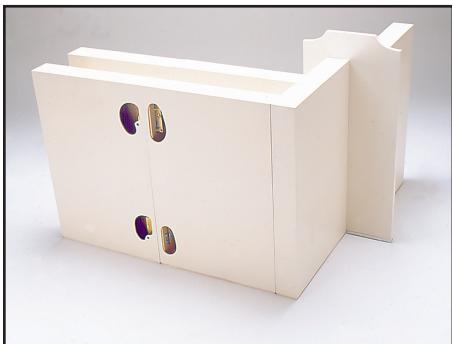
Typical thick and thin panel fabrication using various Type 3 Latches and Receivers for in-line butt joints, corners and 'T' joints.
